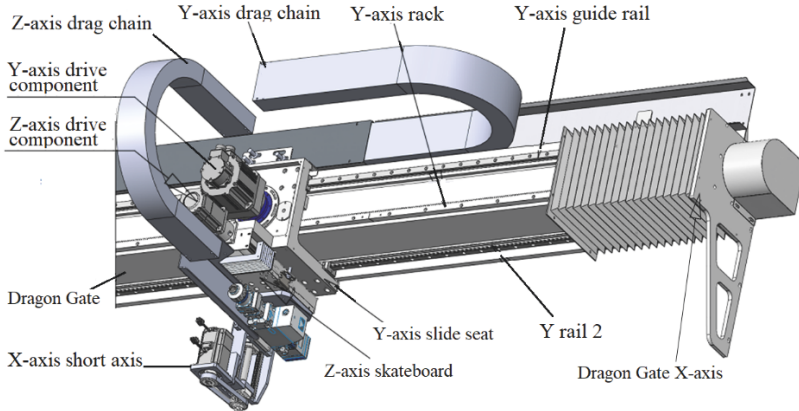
The X-axis and short axis structure of the gantry beam of the laser cutting machine.
